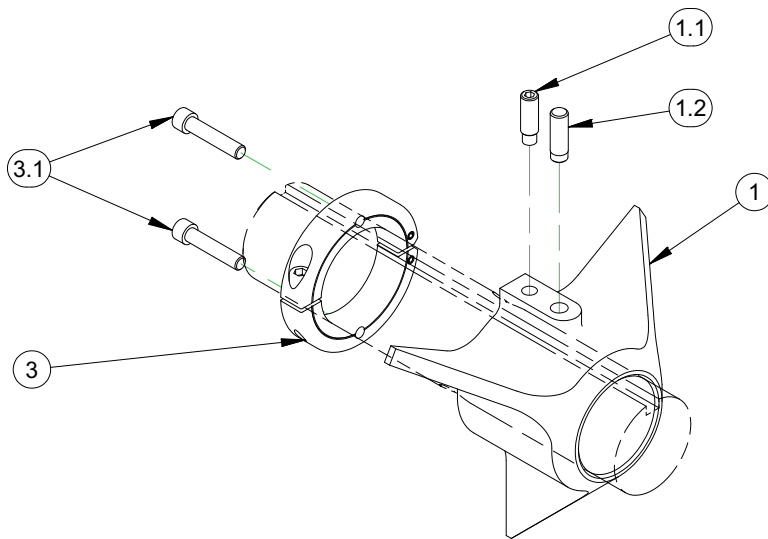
UNIVERSAL BEARING MOUNT ASSEMBLY (P/N 36959)
